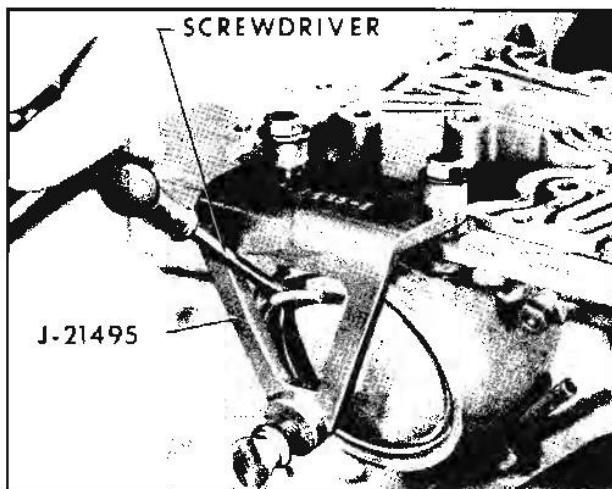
B-58 Removing Low Servo Cover Snap Ring
